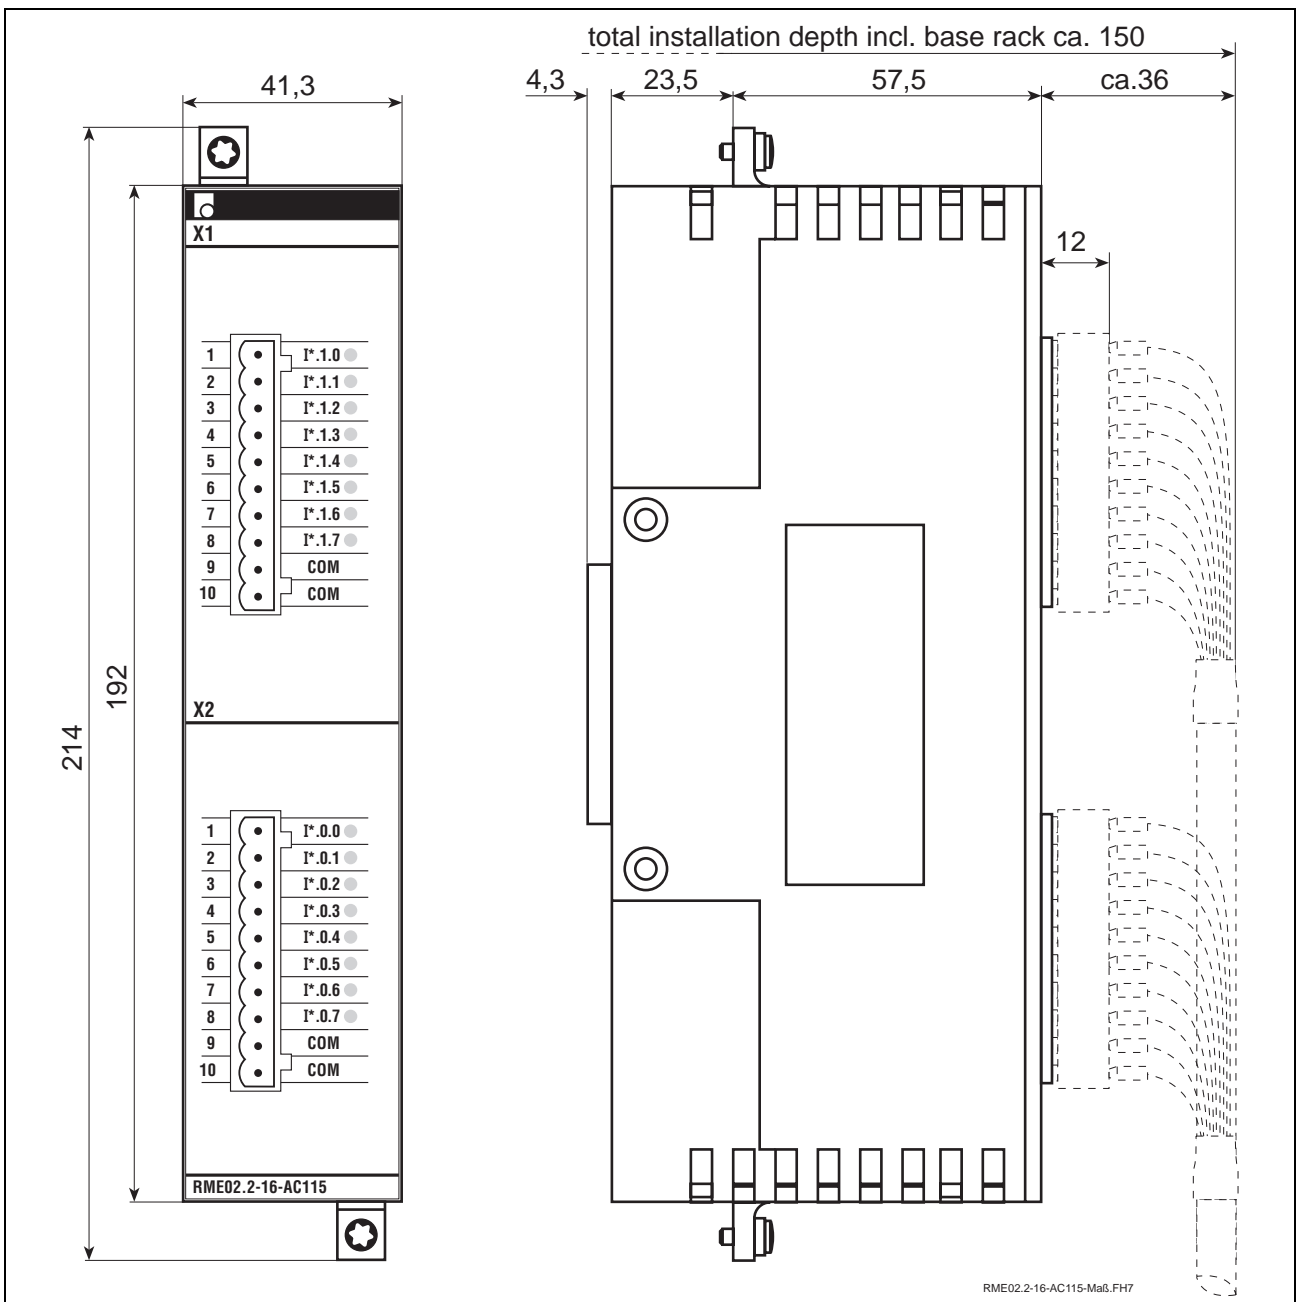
Mounting dimensions of RME02.2-16-AC115
